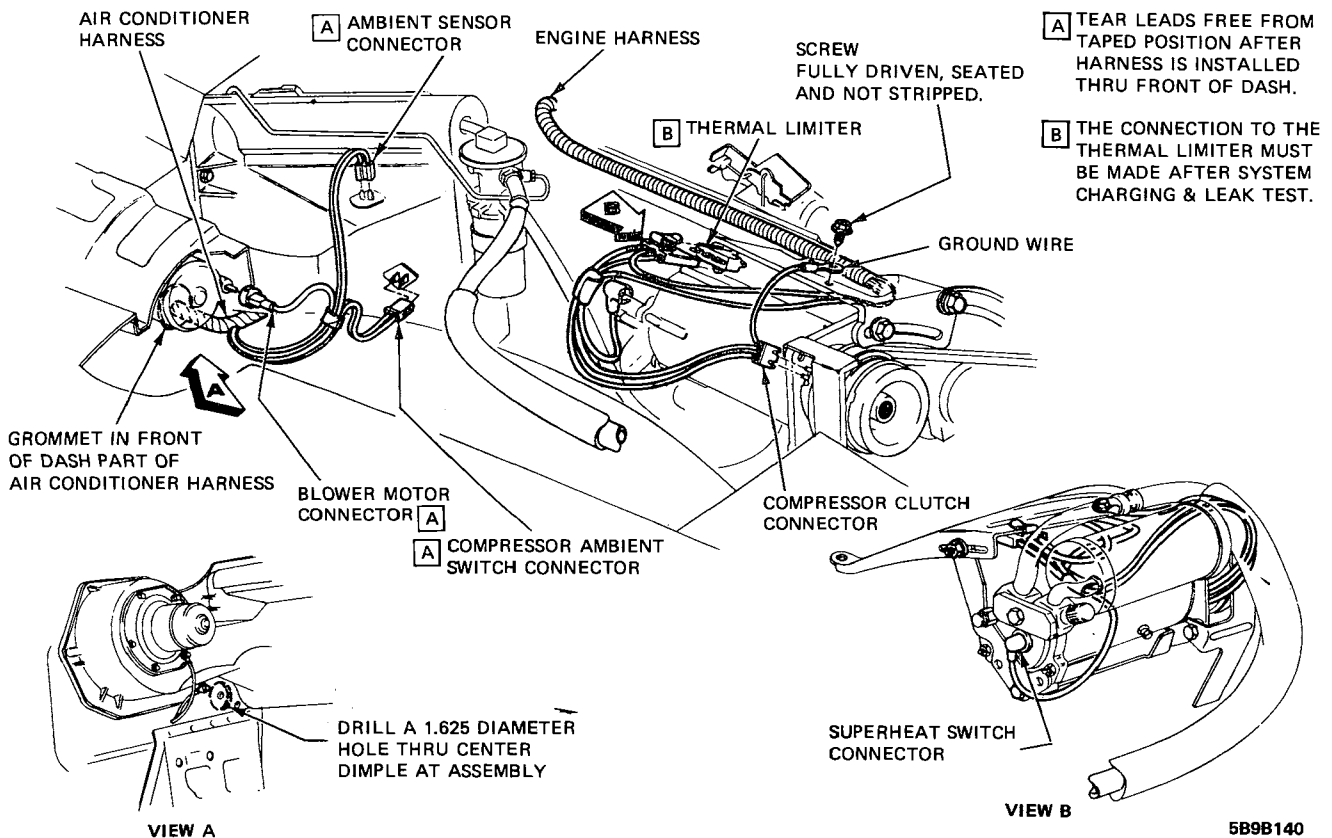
B-286 - Wiring - Automatic A/C Blower Motor Compressor - B-C-E Series
